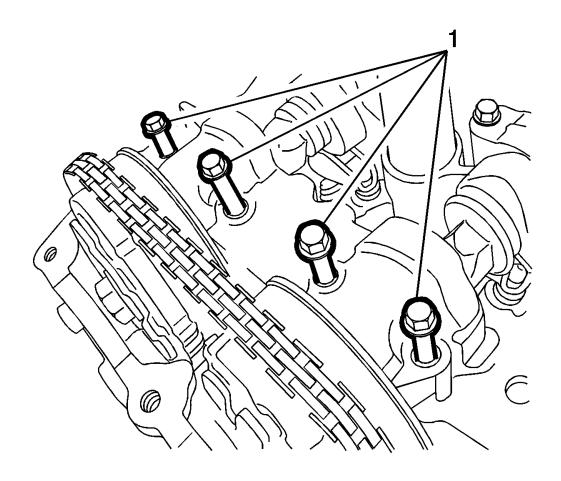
Identifying Camshaft Front Cap & Bolts Courtesy of GENERAL MOTORS COMPANY
